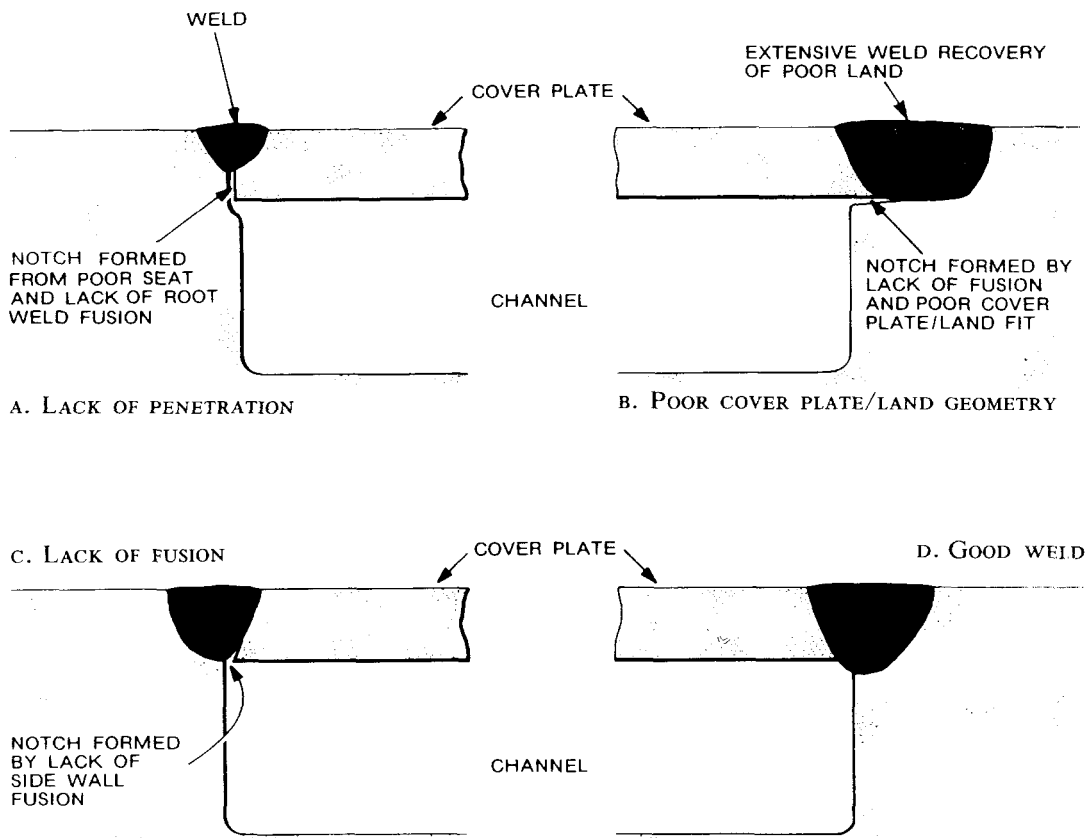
EXAMPLES OF AGOUTI CHANNEL COVER PLATE WELD, ILLUSTRATING TYPICAL DEFECTS
